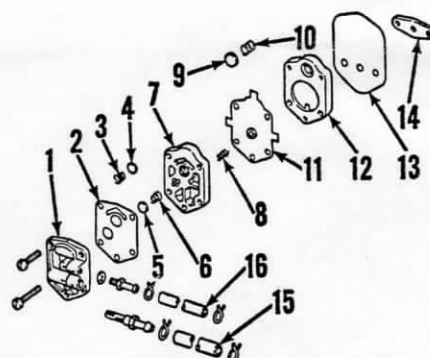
Exploded view of diaphragm type fuel pump used on some models.
